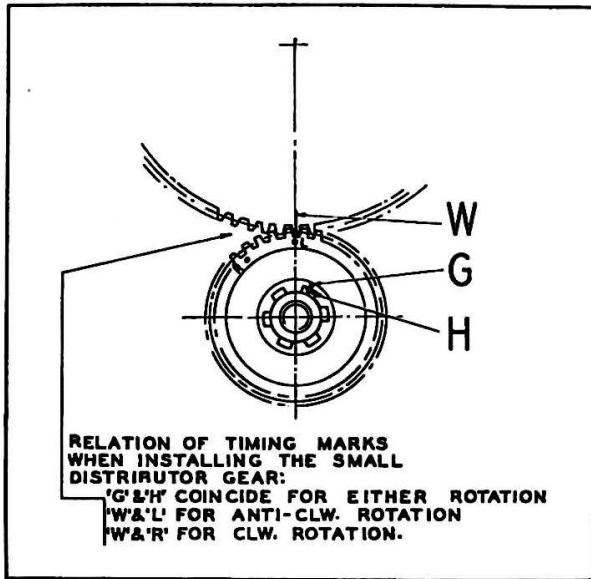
Installing Small Distributor Gear on the Drive Shaft.
